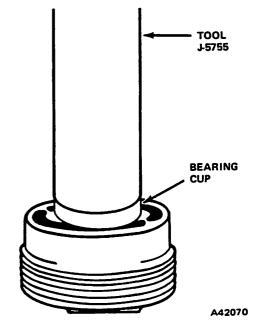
K-10 Installing Wormshaft Lower Bearing Cup
